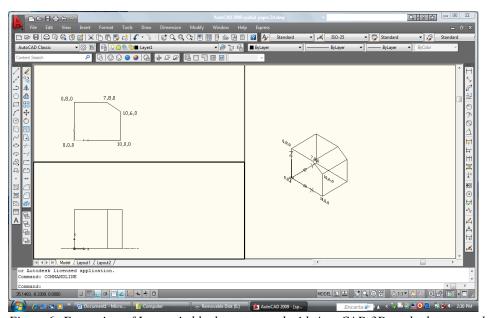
Front view of Isometric block constructed with AutoCAD 3D method at upper left corner
